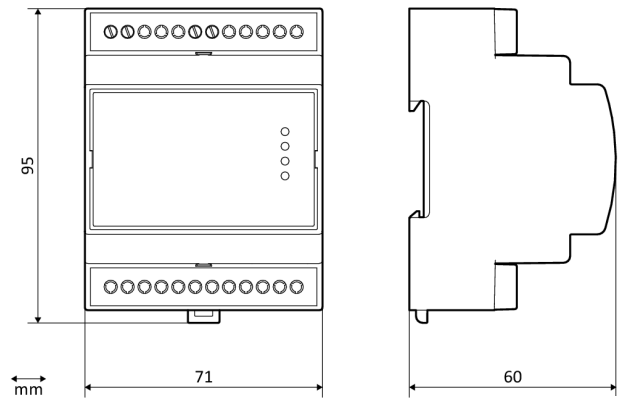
Fig. 2 SIU-MBM-01 dimensions
